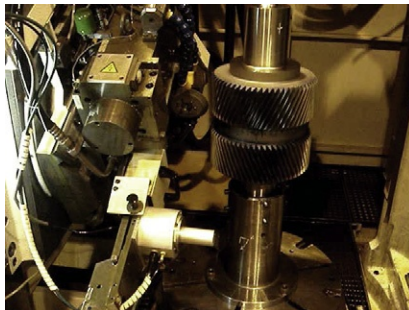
A form grinder (courtesy Lufkin Industries, Inc.).
